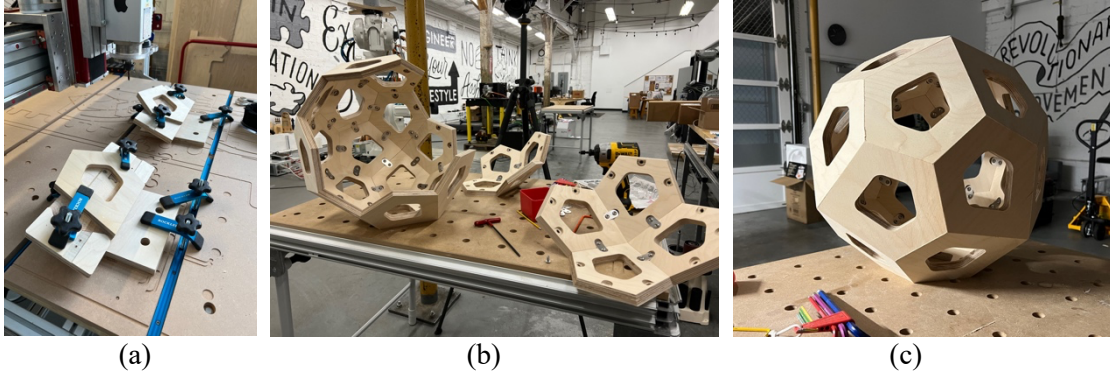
The piece during final assembly at Loupe in Portland, OR
